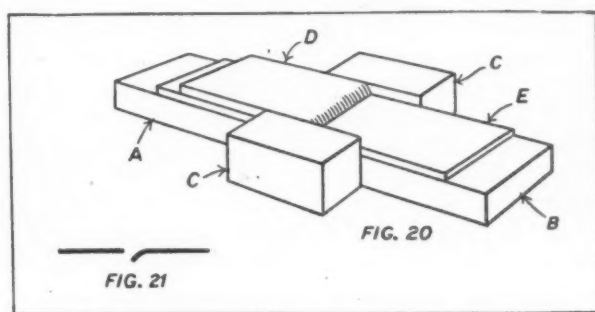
This Arrangement Produces a Clean Sheared Edge as in Fig. 21
